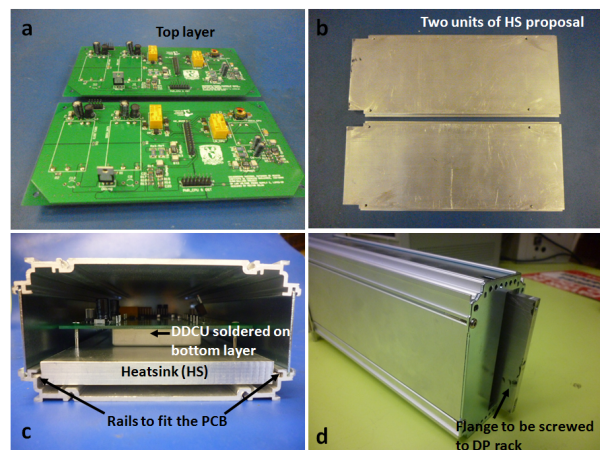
(a) LVPS2-DP PCB, (b) Heatsink proposed, (c) PCB, heatsink and unit box assembly, (d) Heatsink rear side to be assembly with cooling plate of DP structure.
